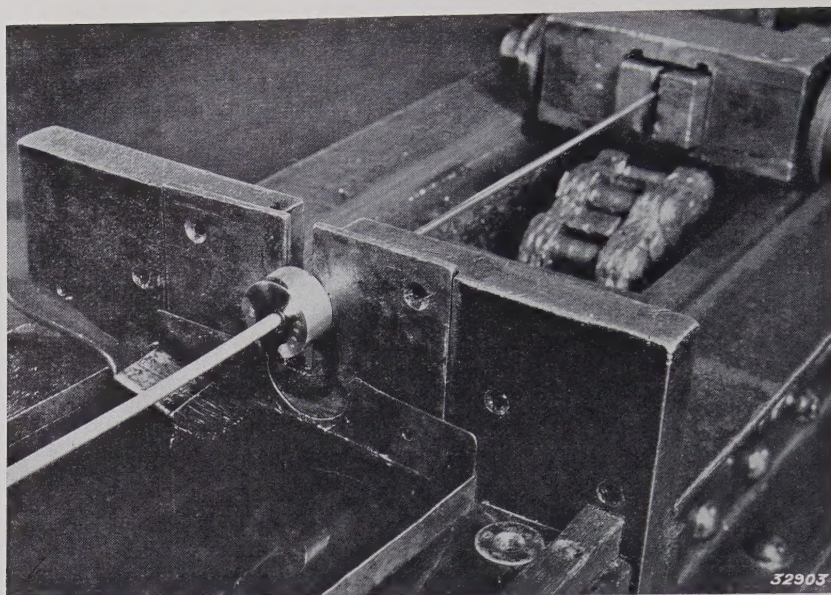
A die with a "hard cemented carbide" core in use. It may clearly be seen in the photograph, that the wire has a smaller diameter after passing through the die.
